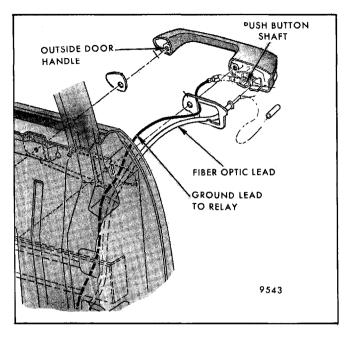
Illuminated Lock Cylinder Door Handle Push Button Assembly
